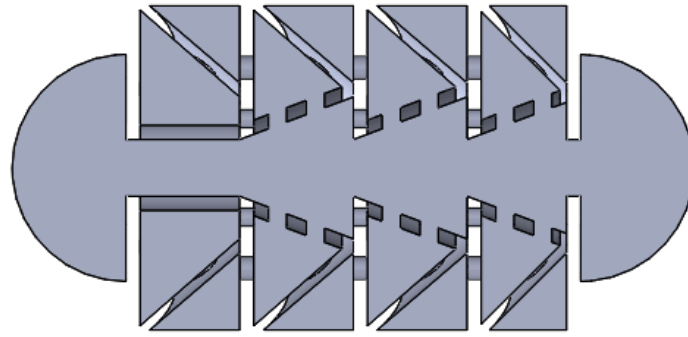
MIMO - Large Cavity AMM - Internal Cavity CAD - Vertical Cross-Section View
